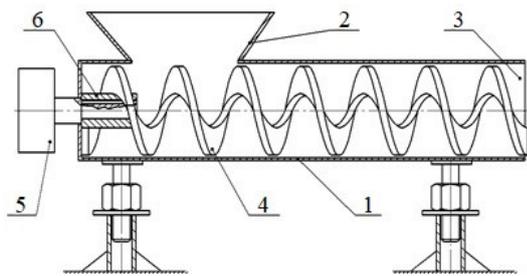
Schematic diagram of spiral-screw dispenser: 1 – cylindrical casing; 2 – loading neck; 3 – discharge neck; 4 – spiral; 5 – drive (geared motor); 6 – coupling
